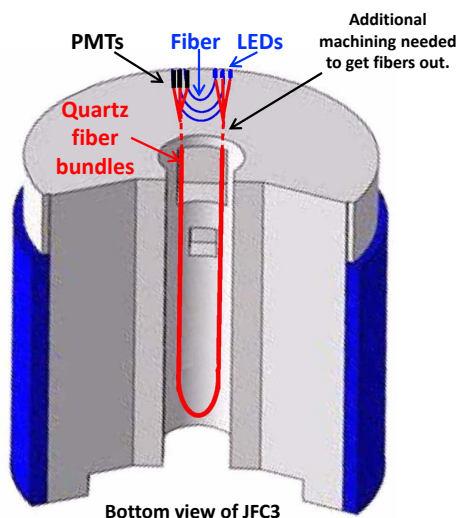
A bottom-view of the JFC3 forward shielding piece with the location of the fiber detector.
